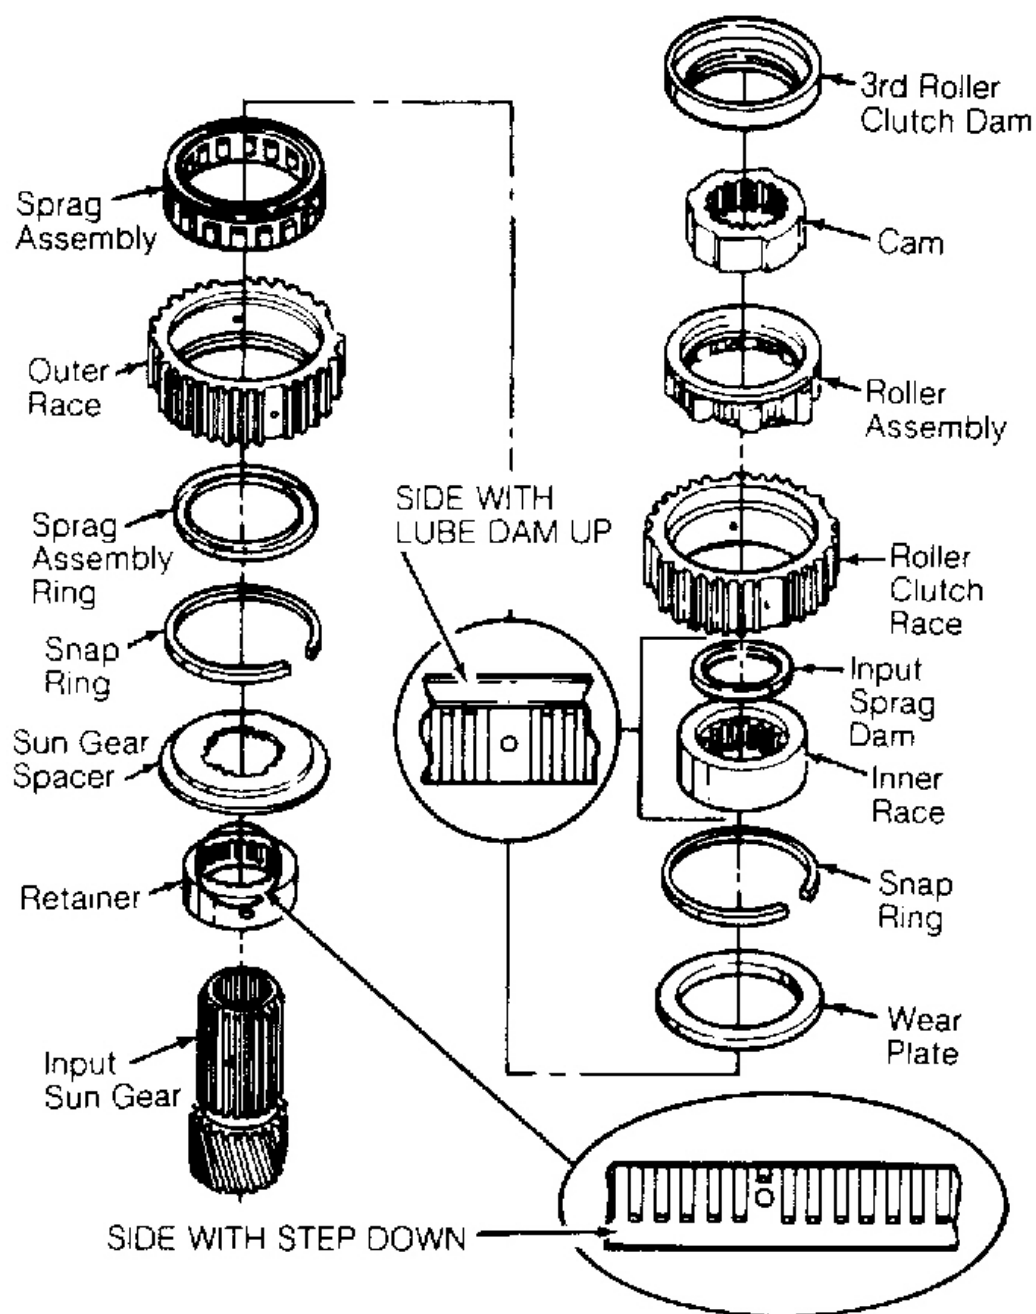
Exploded View of Input Sprag & 3rd Roller Clutch Assemblies
